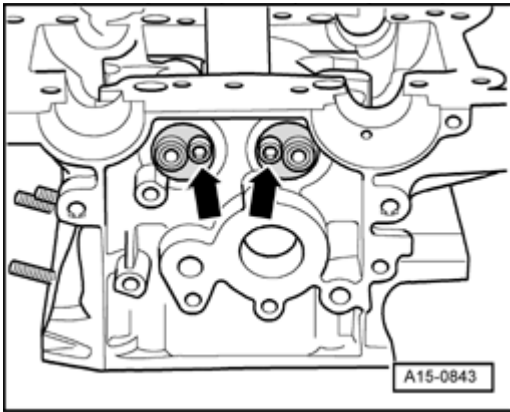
Inserting Camshafts In Cylinder Head And Tighten With Outer Bearing Caps
